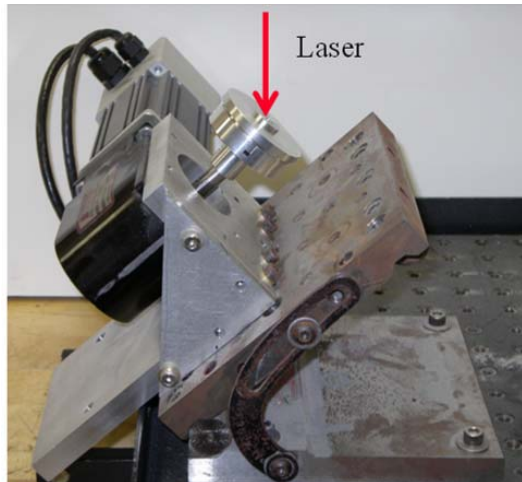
The Reclamation Weld Bases Were Repaired Using the 4th Axis Mounted in the LENS machine at 45° to Horizontal
